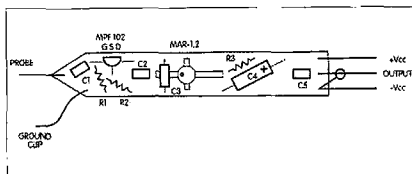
Parts layout for FET probe using a Mini-Circuits MAR-1 or MAR-2 MMIC.
